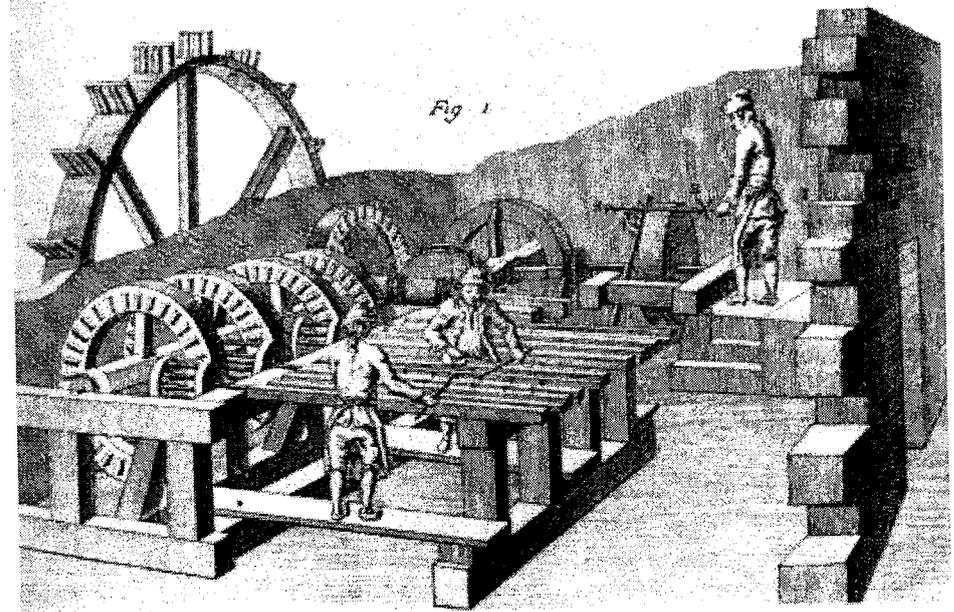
Machinery for boring gun barrels and the outside of the barrel being ground on a stone at the rear. The boring bit is welded onto a long iron rod and is turned, through gearing, by the waterwheel. A sliding carriage holds the barrel which is forced on to the boring bit by a lever. (Reproduced from *Encyclopédie* by Denis Diderot & Jean d'Alembert.)
